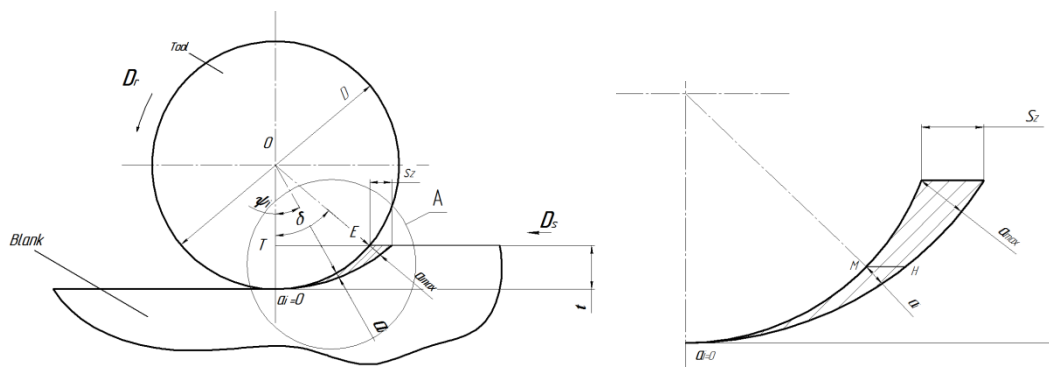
Elements of cutting mode and cutting layer geometry for machining with cylindrical milling cutter
